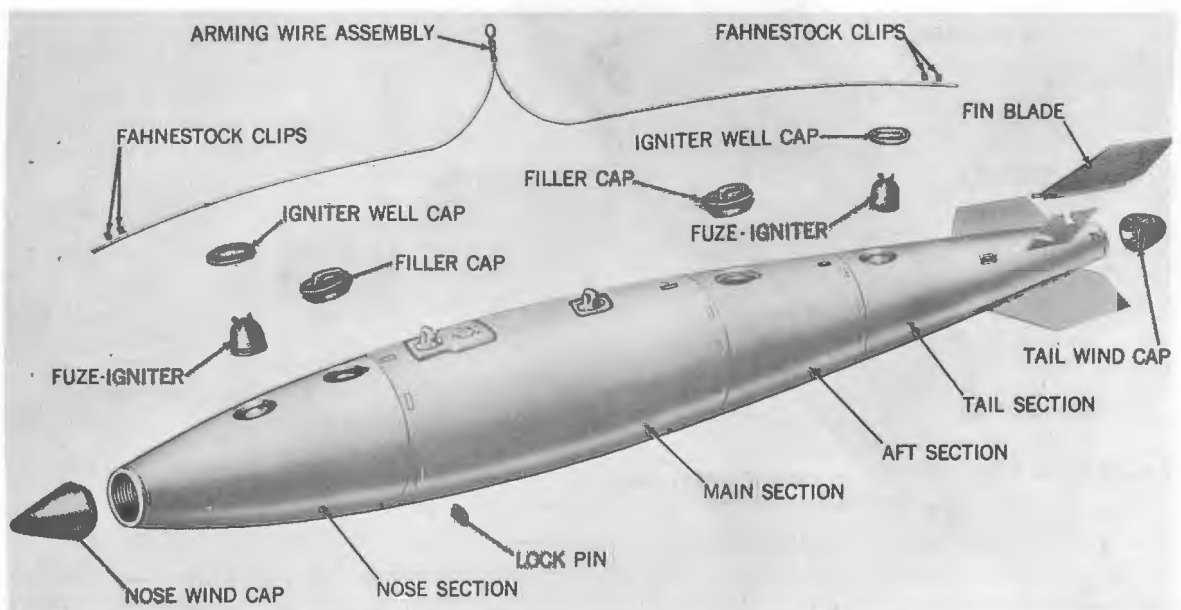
1000-lb Fire Bomb Mk 79 Mod 1, Exploded View.
